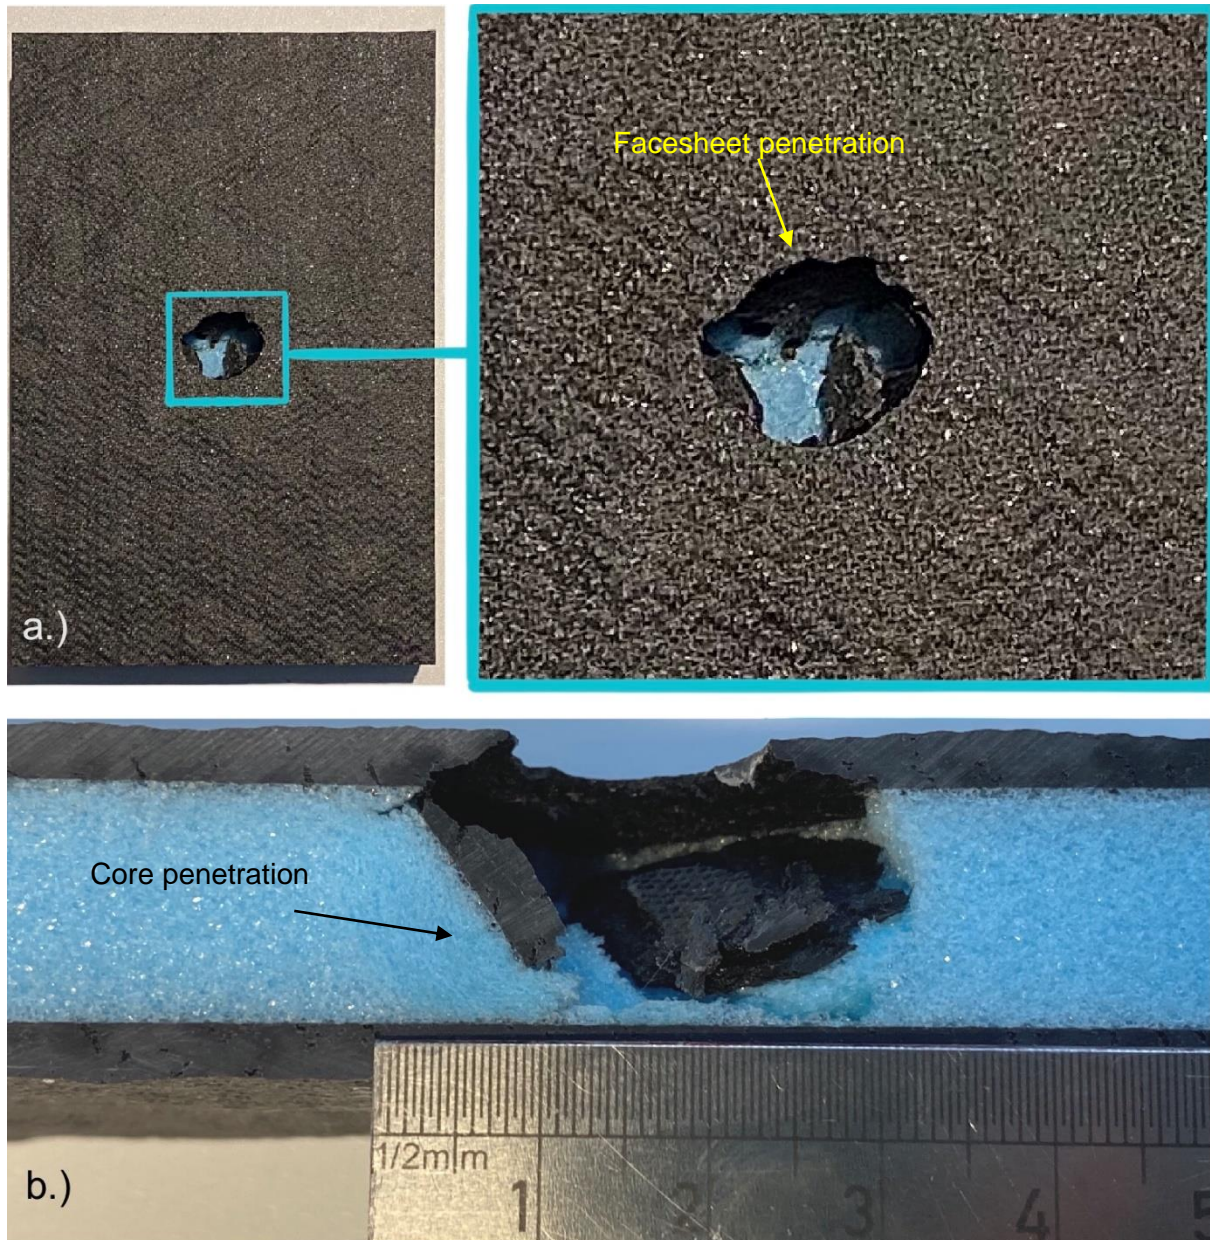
Top facesheet view and b.) cross sectional view of impacted RCF specimen at 20 J
